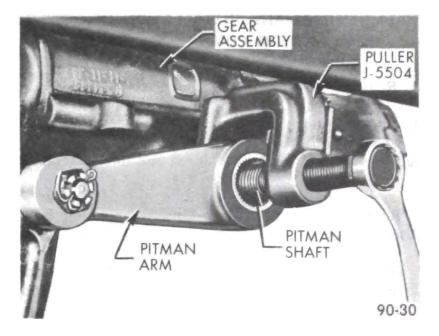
Removing Pitman Arm From Pitman Shaft
